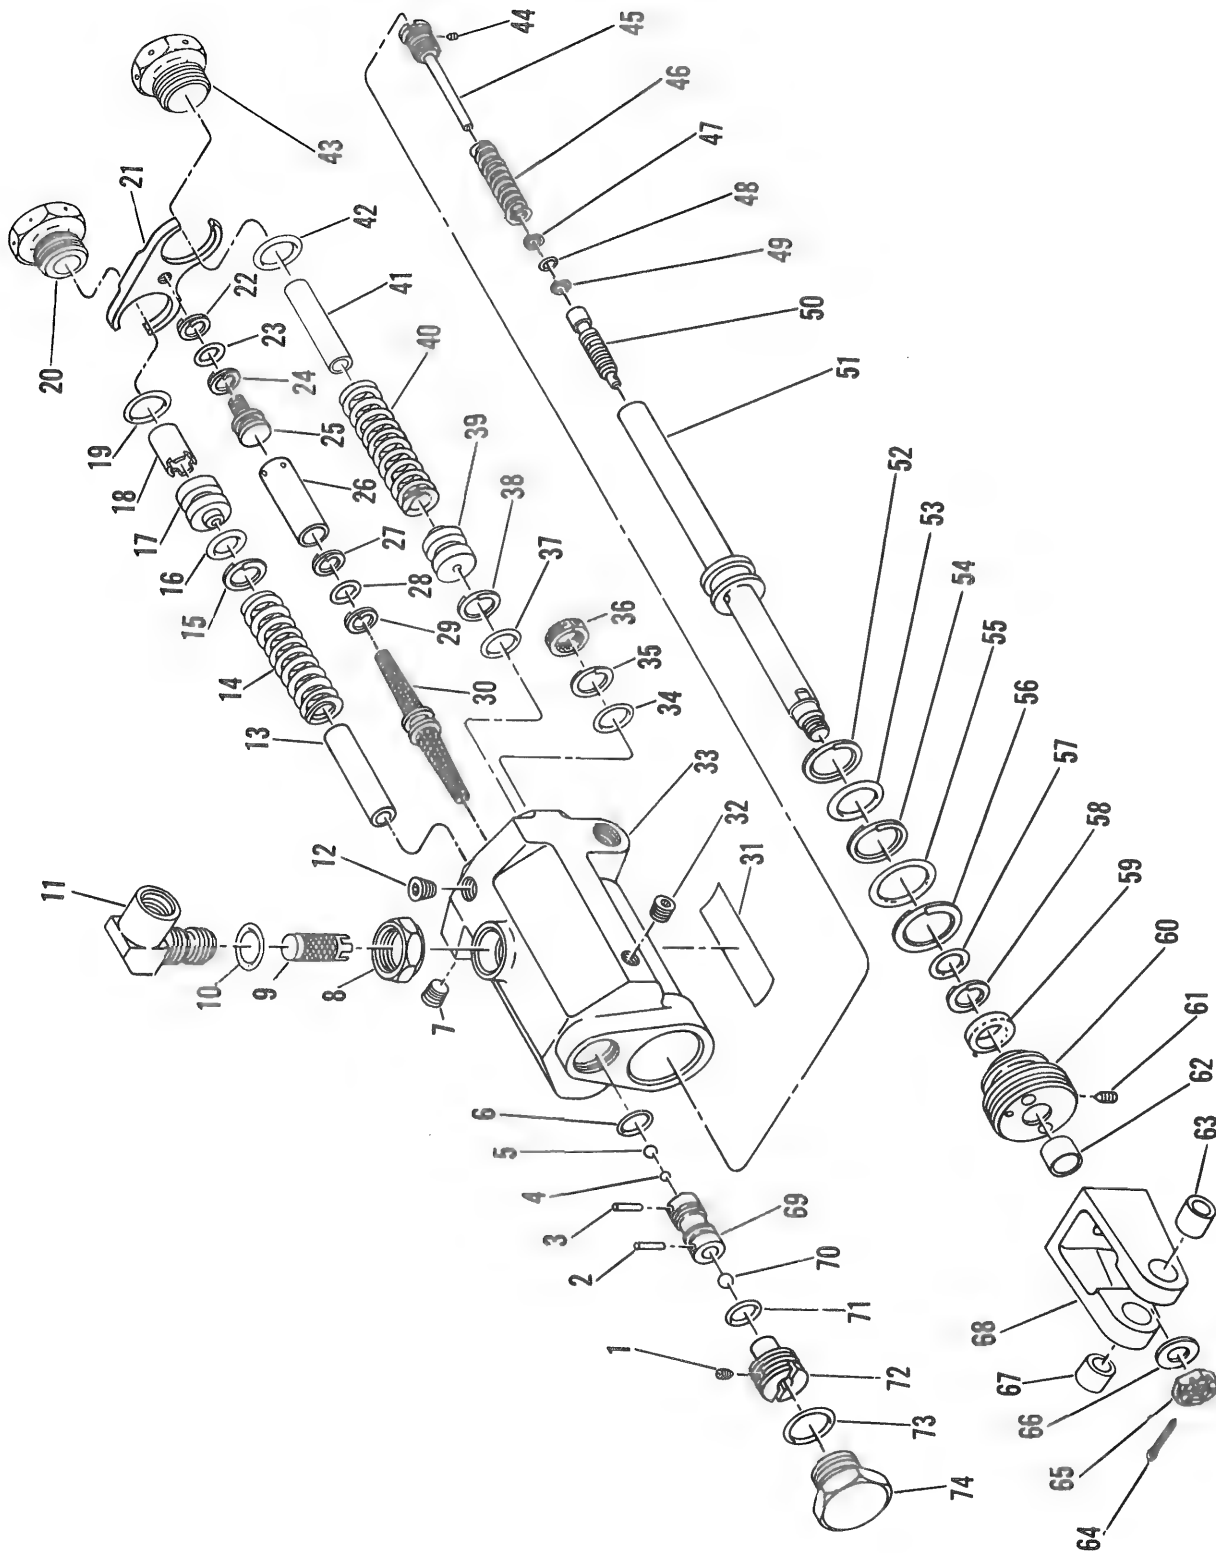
Pedal Damper Assembly—Disassembled (Sheet 1 of 2)
